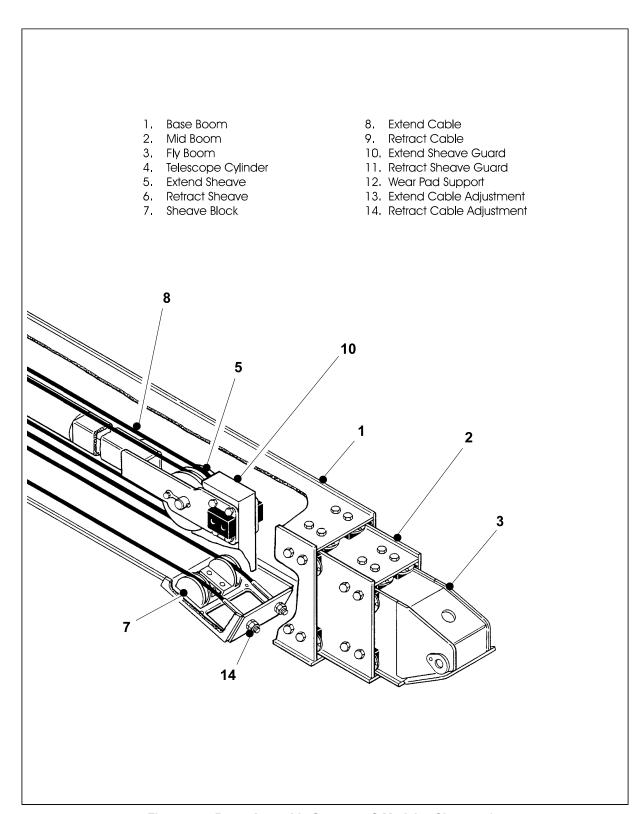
Boom Assembly Cutaway - S Models - Sheet 2 of 3
